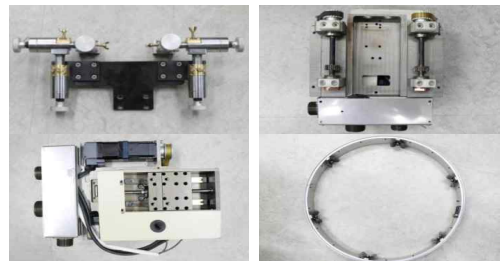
Partial features of automated pipe tandem GMA welding carriage(torch, drive, weaving and rail)
